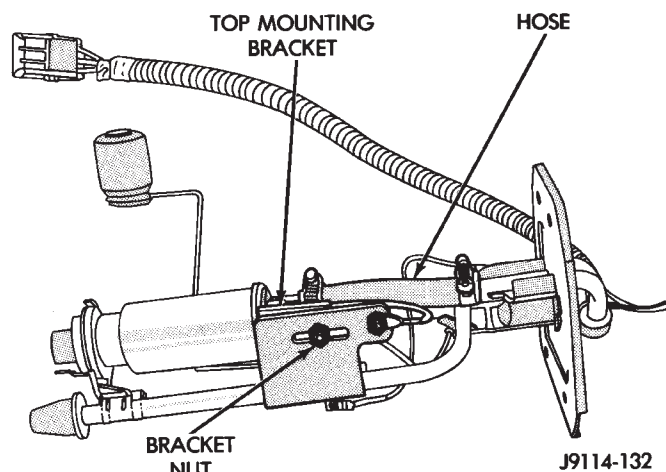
Fuel Pump Removal/Installation—YJ Models
